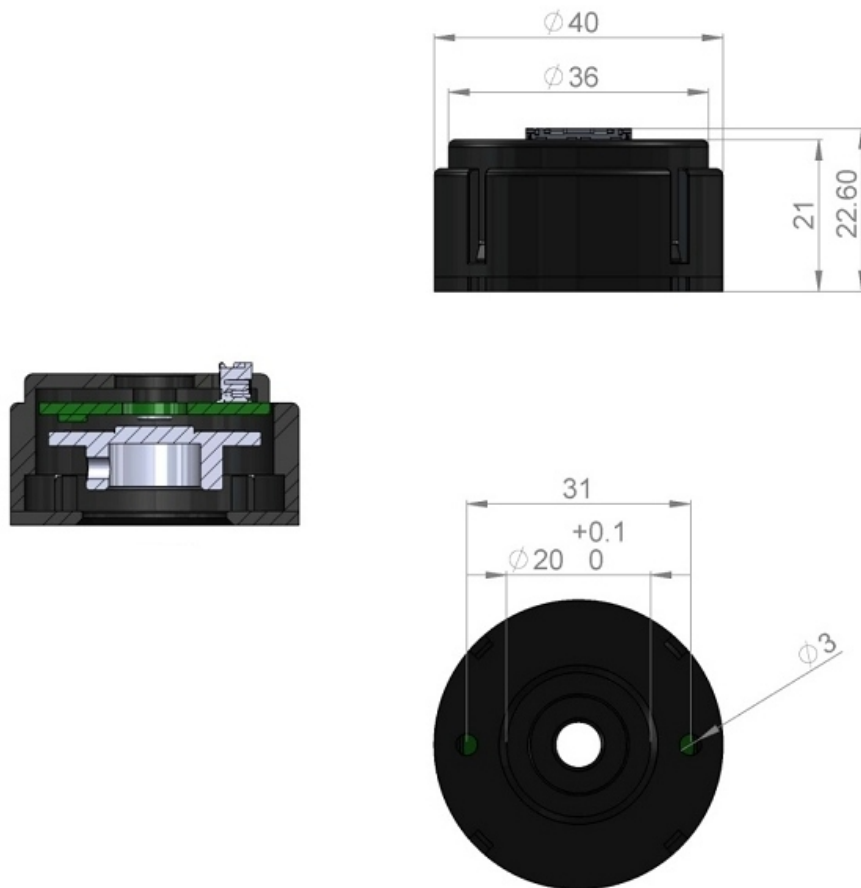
Bottom view, top view, side view, and cut view (units = mm)
